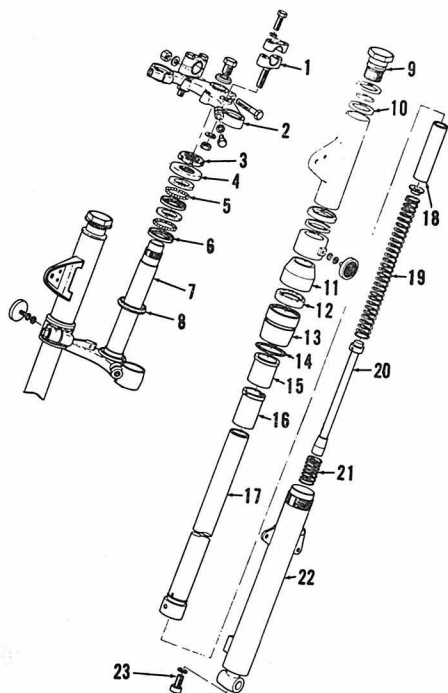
Exploded view of typical CT-1 and AT-1 front end assembly. HT-1 units are similar.
